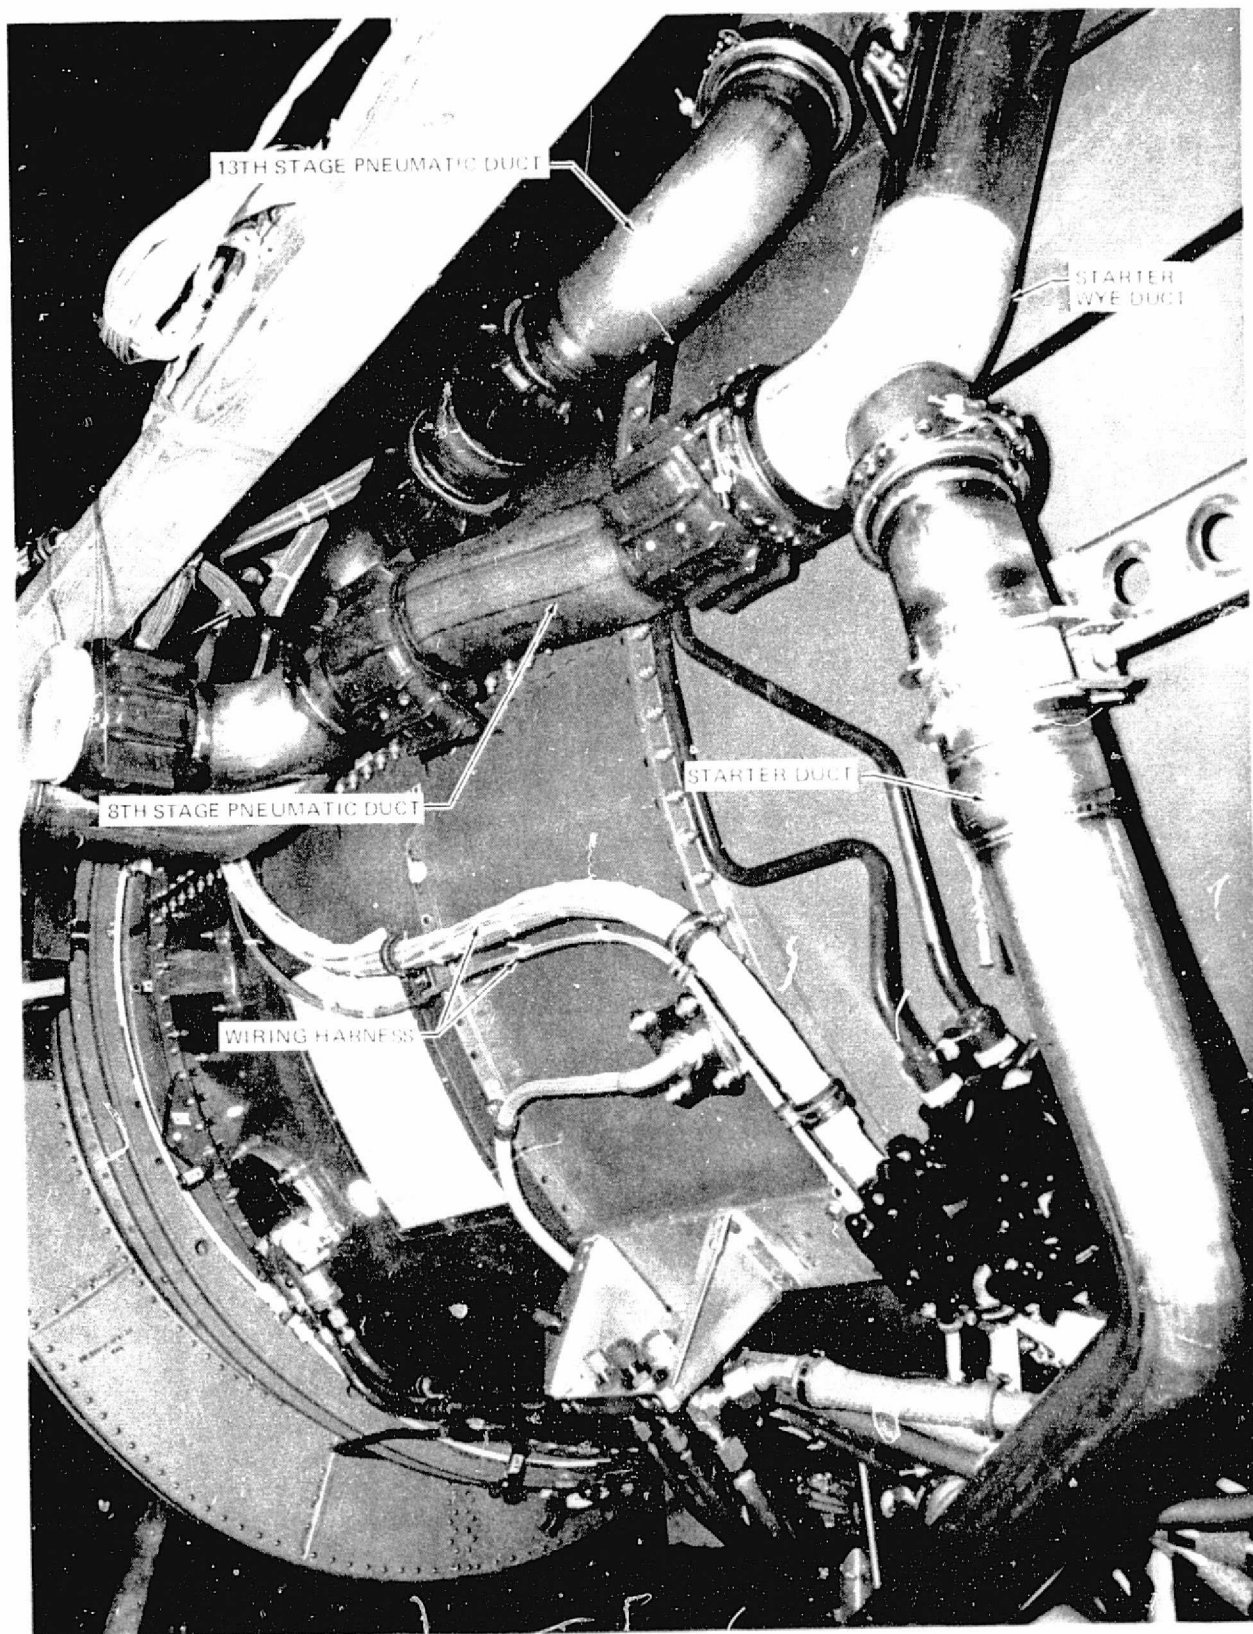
LEFT ENGINE PNEUMATIC AND STARTER DUCTING - MOCKUP ENGINE
